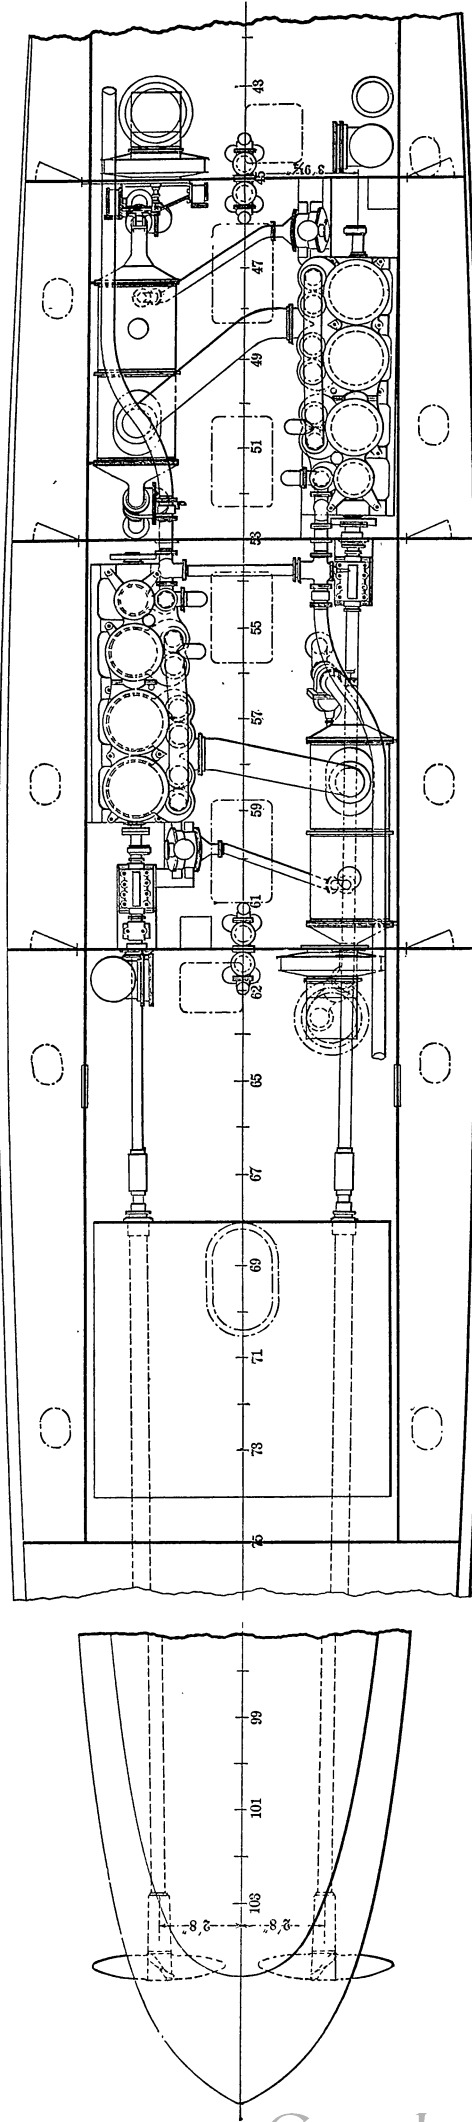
Sectional Plan, Showing Arrangement of Engines.
